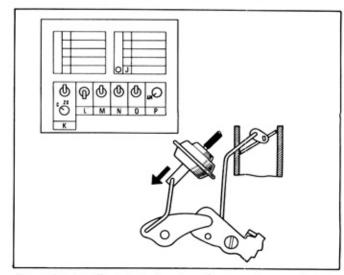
Fast Idle Breaker System Inspection (4M)
